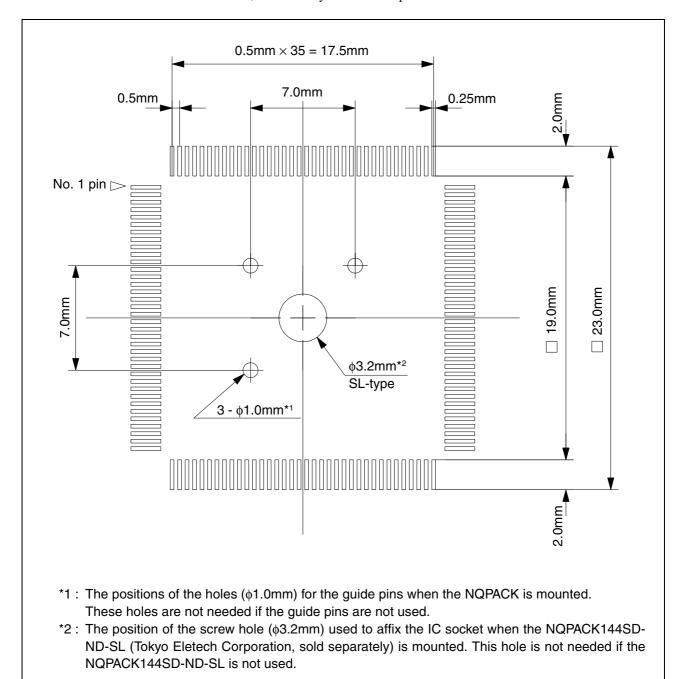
Recommended dimensions of the footprint for mounting the NQPACK
